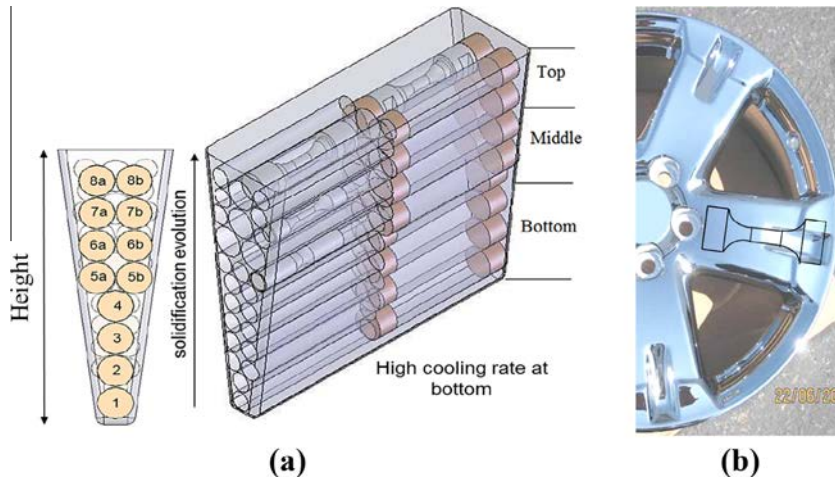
Location of fatigue specimens: (a) extracted from a wedge casting, and (b) extracted from the spoke.
